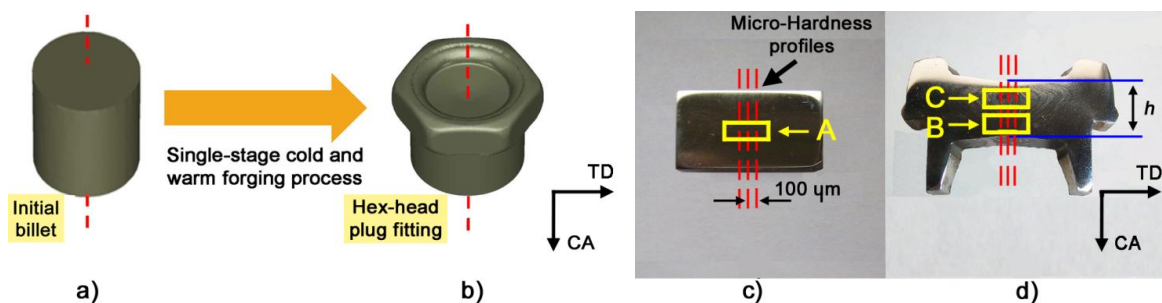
CAD geometry of initial billet a) and hex-head plug b), longitudinal sections of real billet c) and forged component d).
